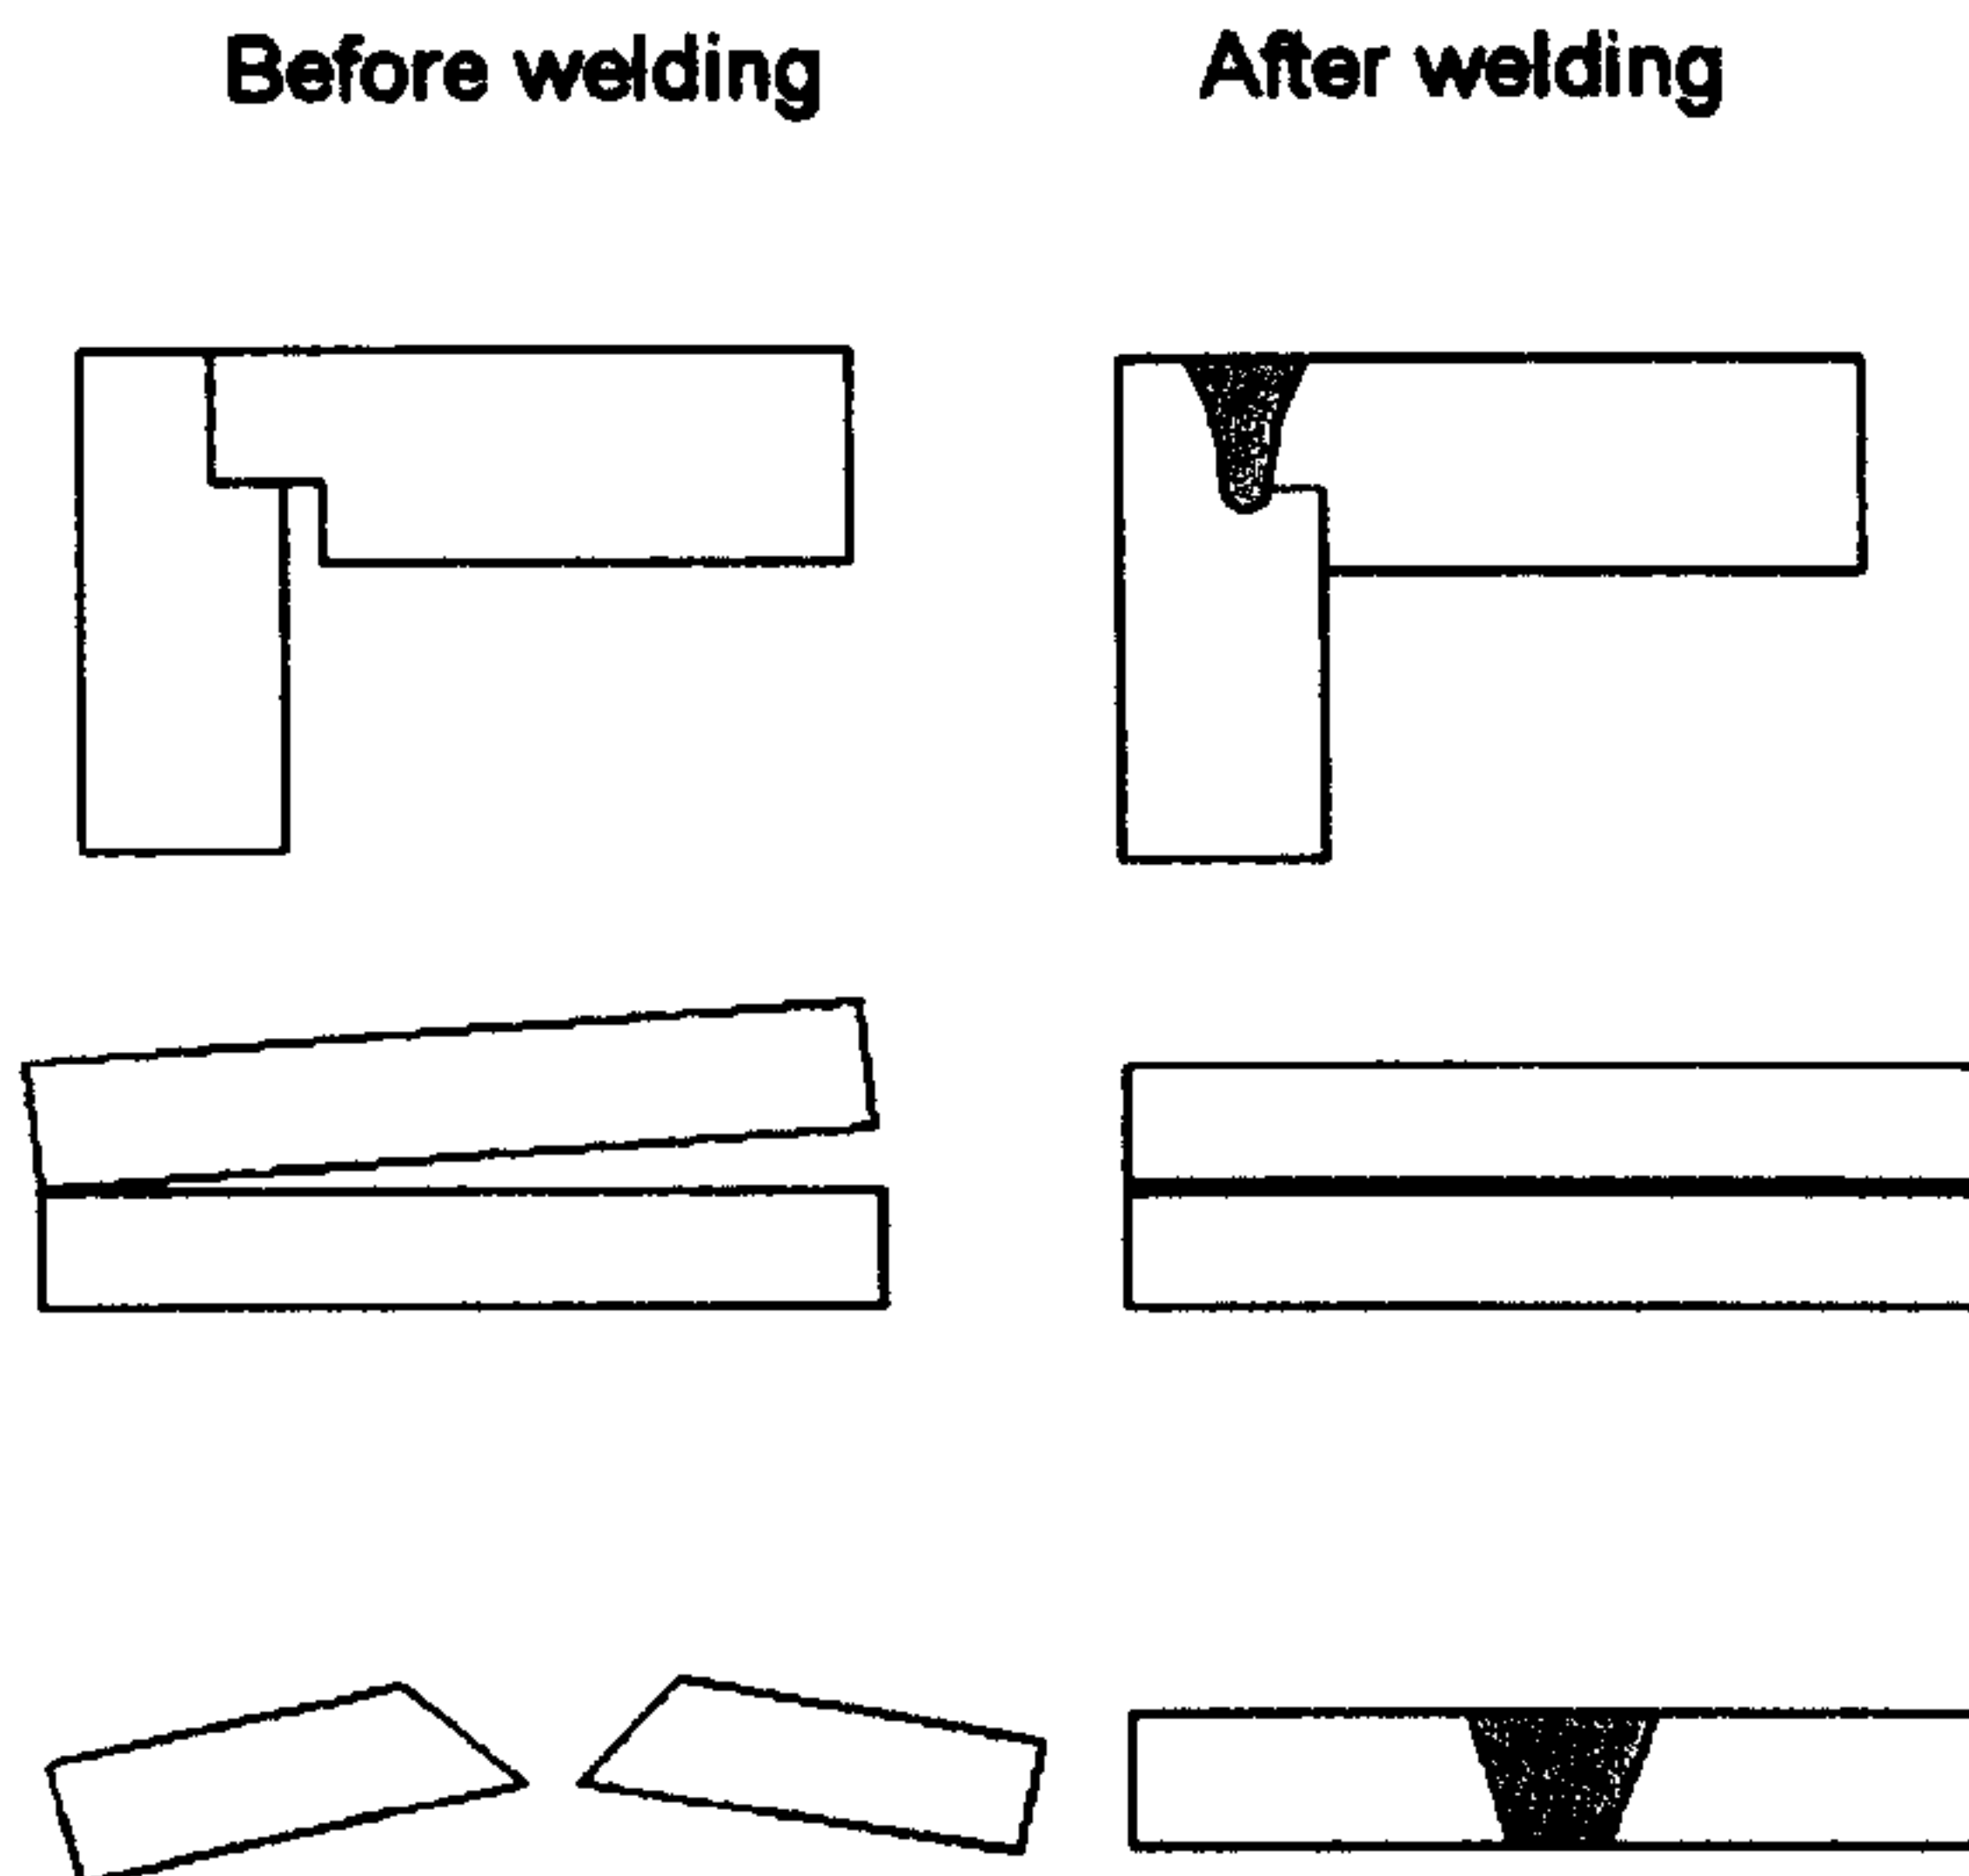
Edges preparation and assembly to minimize the distortion following welding [1, 20]
